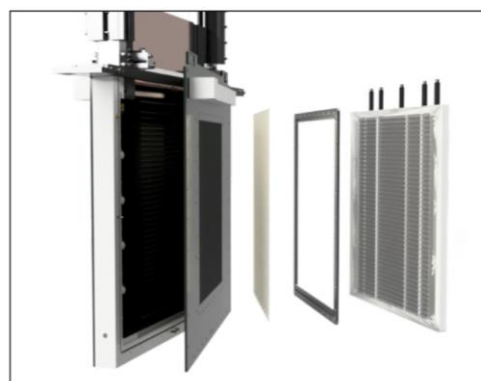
Contents of one side of a plating cell, including segmented anode and close-edge shield. The panel holder is shown on the left side.
